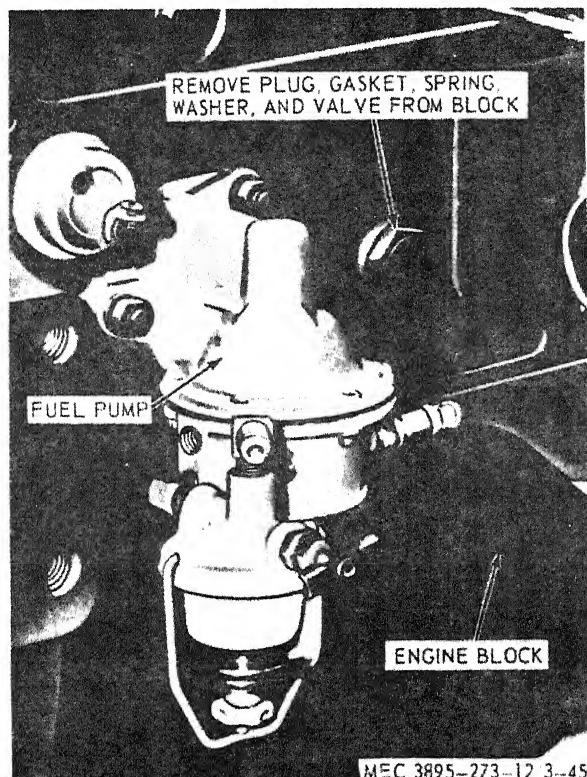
Engine oil pressure regulator valve, removal and installation.
